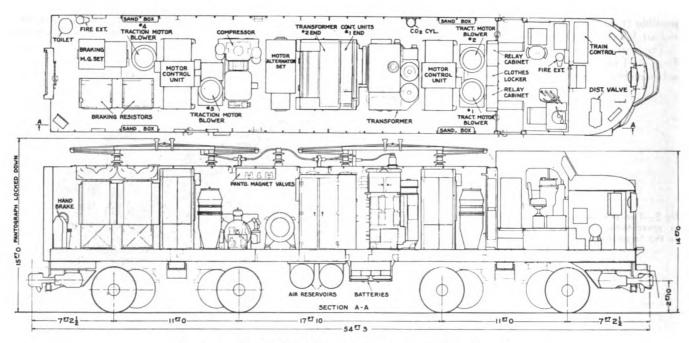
Location of principal pieces of apparatus in the locomotive cab
